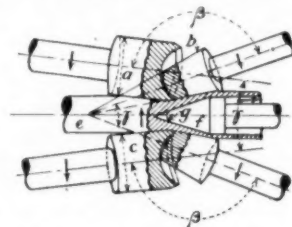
FOUR-ROLL BILLET-PIERCING AND TUBE-ROLLING MILL
